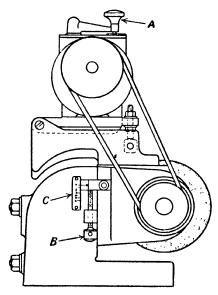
Arrangement of controlwheel drive on Scrivener machine
